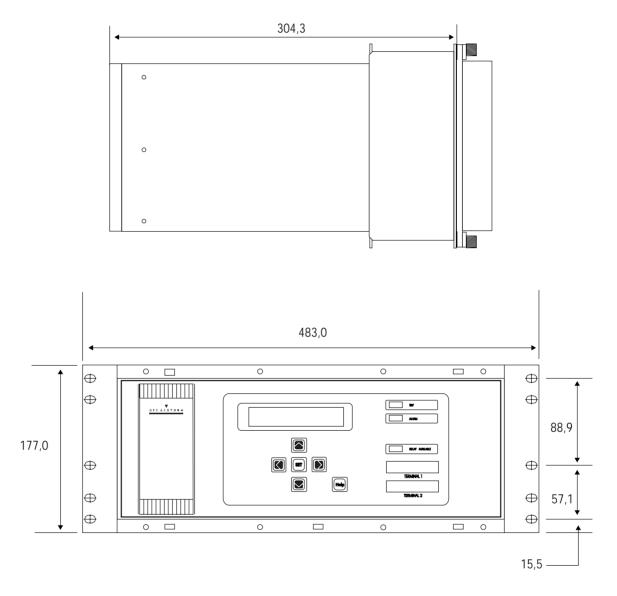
Rack dimensions when cabinet-mounted (EPAC 3500)
